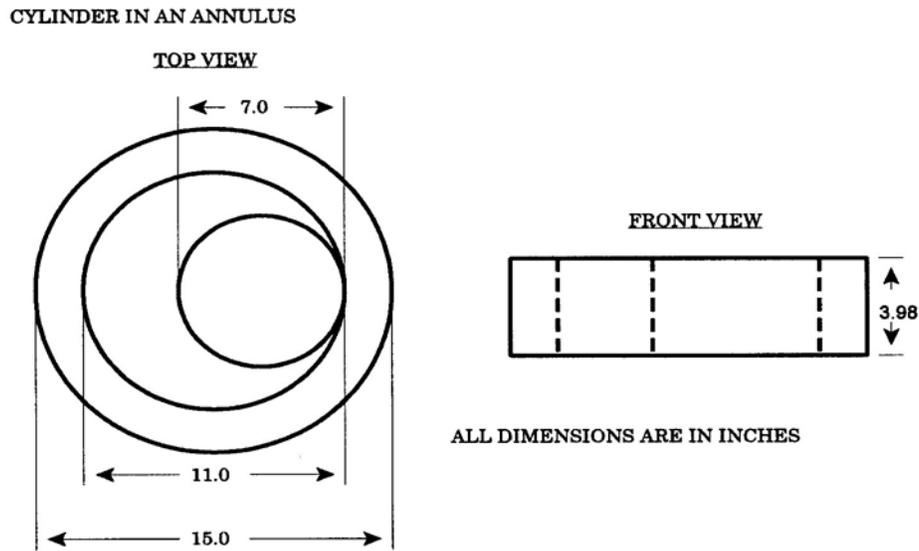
Drawing of the cylinder in an annulus critical assembly.
